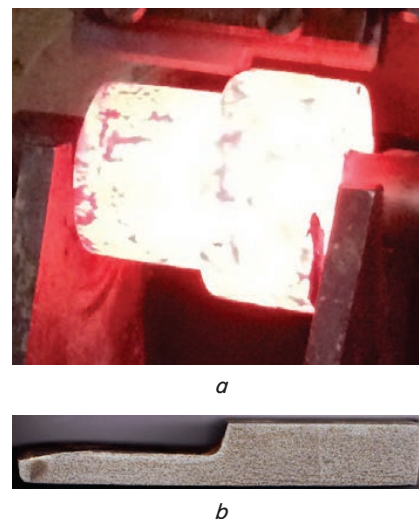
Experimental study: the process of expanding steel blanks in a hot state (a); the forging macrostructure in a cross-section (b)
